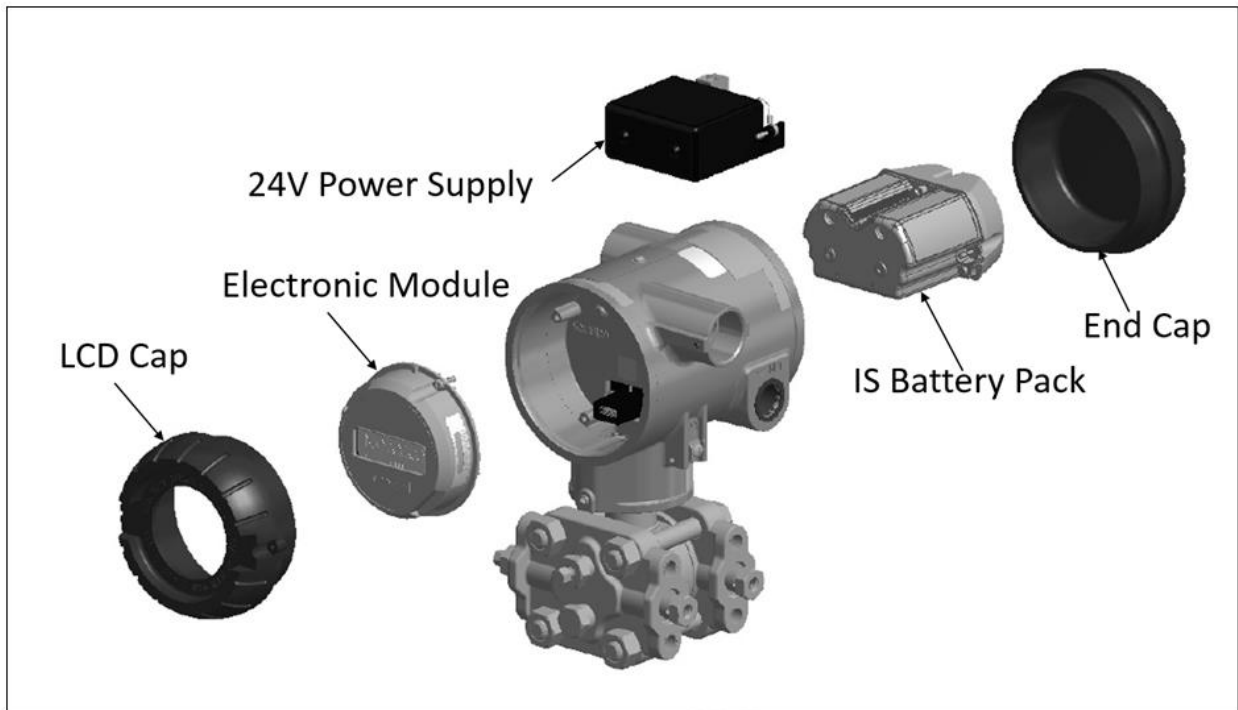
SmartLine Wireless Transmitter Electronics Housing Components
